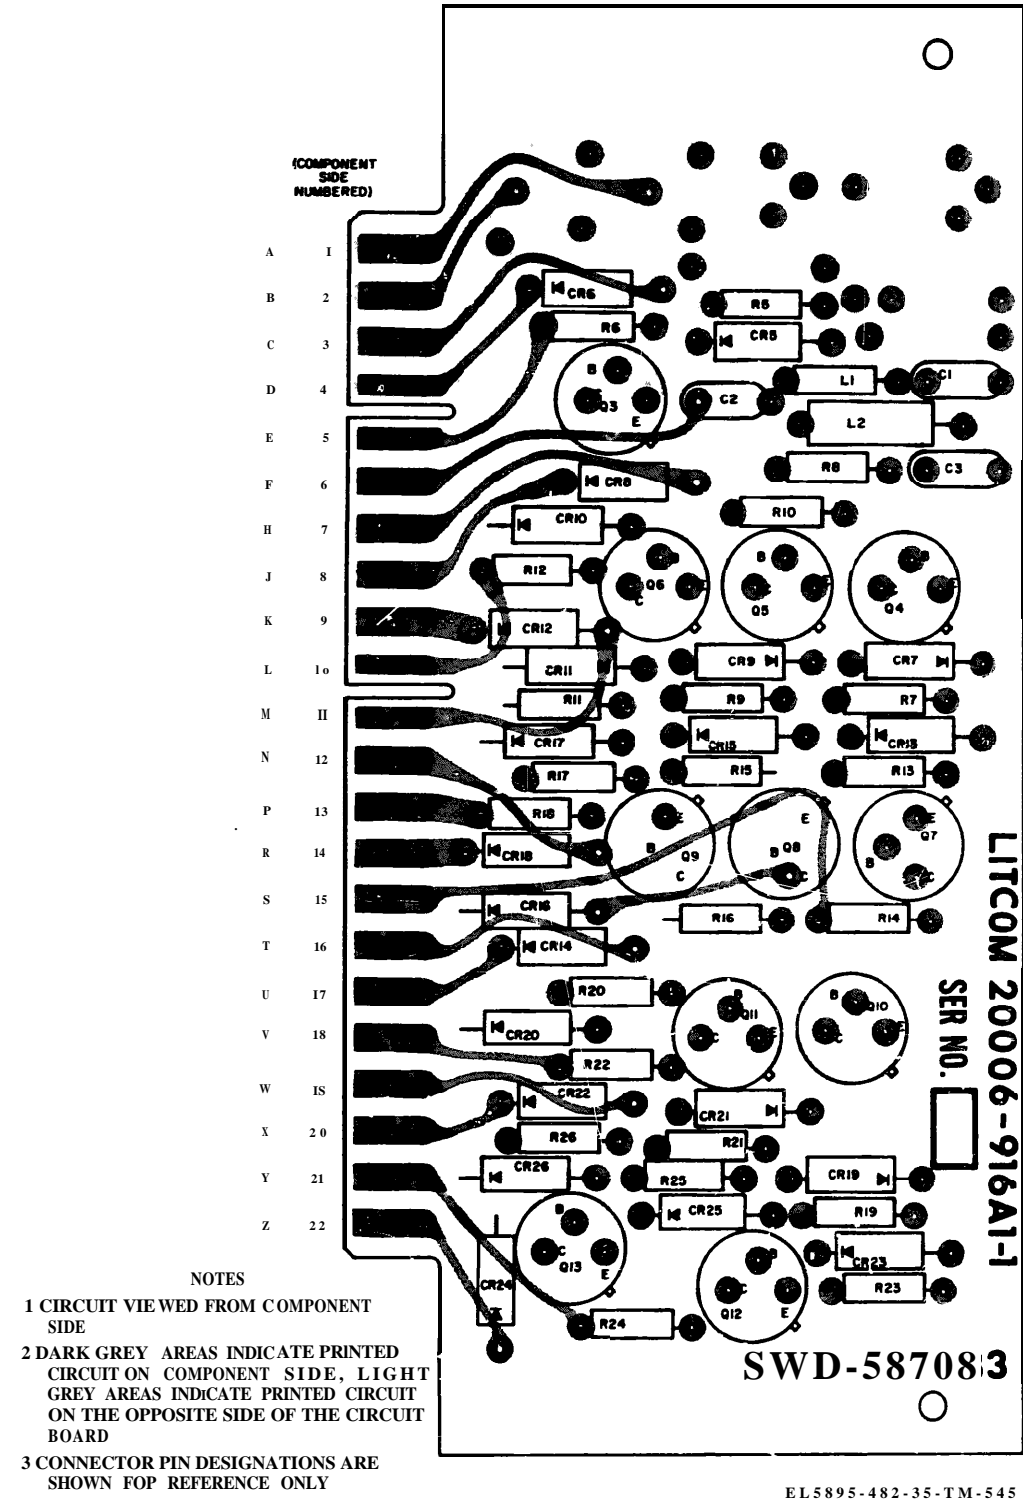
Remote control switching A12 wiring diagram and parts location
